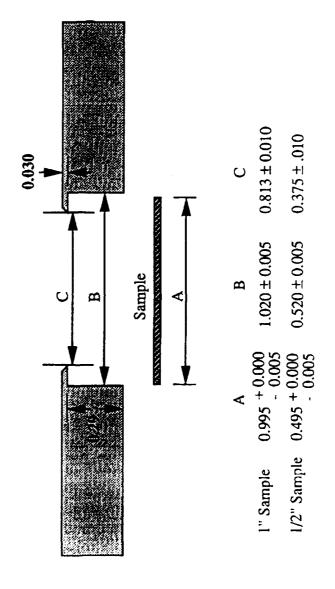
DIMENSIONS OF SAMPLE HOLDER ON CARRIER TRAY
